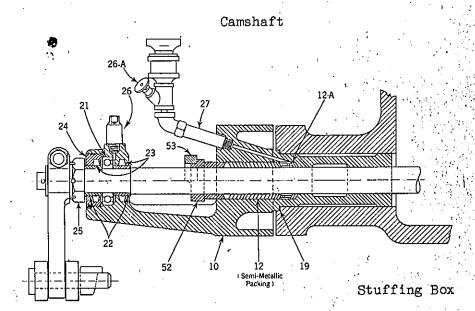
Throttle Header Assembly, Camshaft and Stuffing Box
